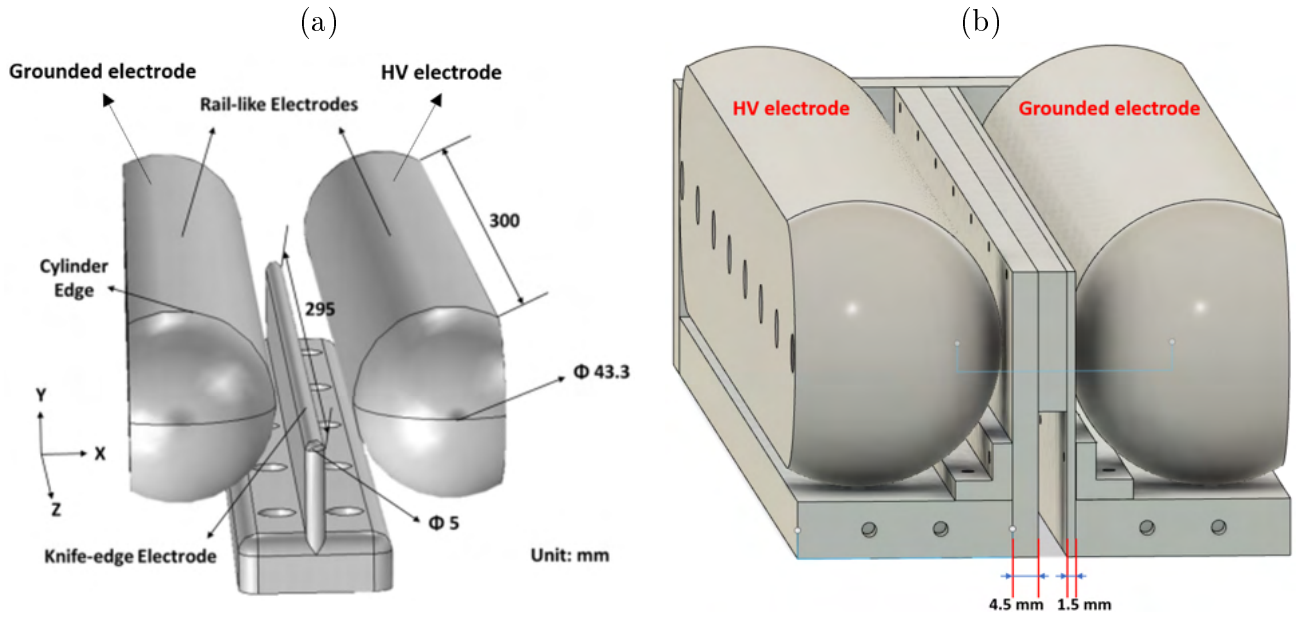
(a) Enlarged CAD drawing of HV, grounded electrodes, and knife-edge electrode. (b) The CAD drawing of the spacer with the rail-gap switch.
